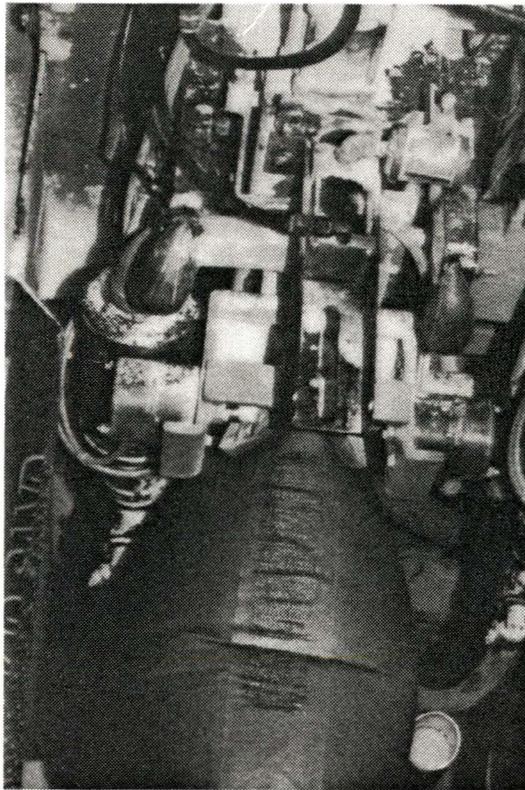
Bag clamp assembly no. 1 with modified clamp.
